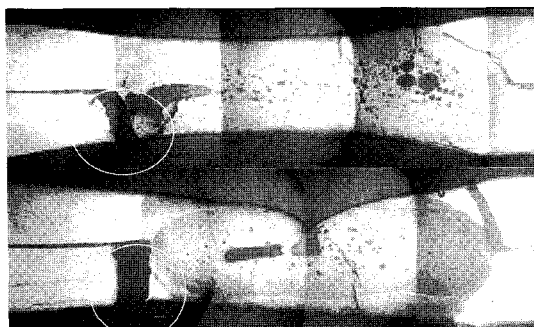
Specimen with fatigue failure (Upper: 0~1800N, Lower:0~750N)
